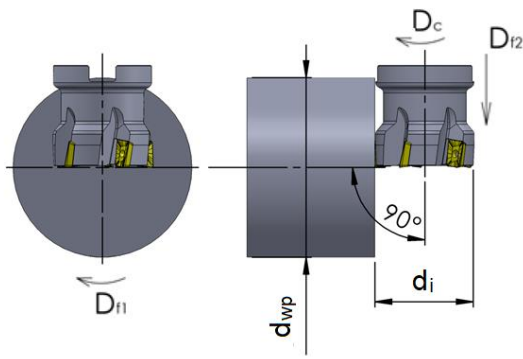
Kinematic milling scheme of an external frontal surface of a centralized lathe pivot, when the axis of rotation of the workpiece and the tool intersects.
